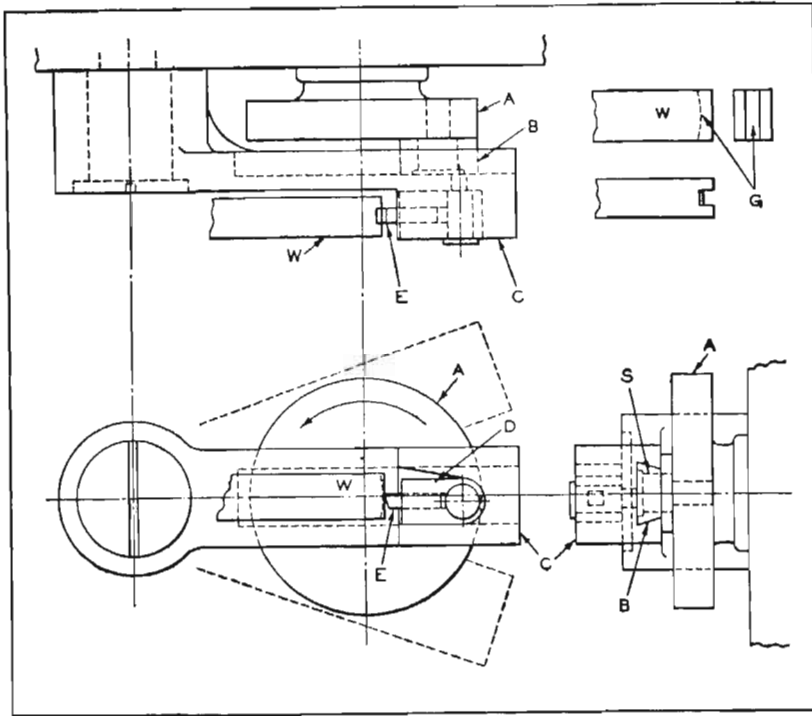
Mechanism Applied to Milling Machine for Oscillating Shaper Tool Used to Cut Groove *G* in Work *W*, Shown at Upper Right.
